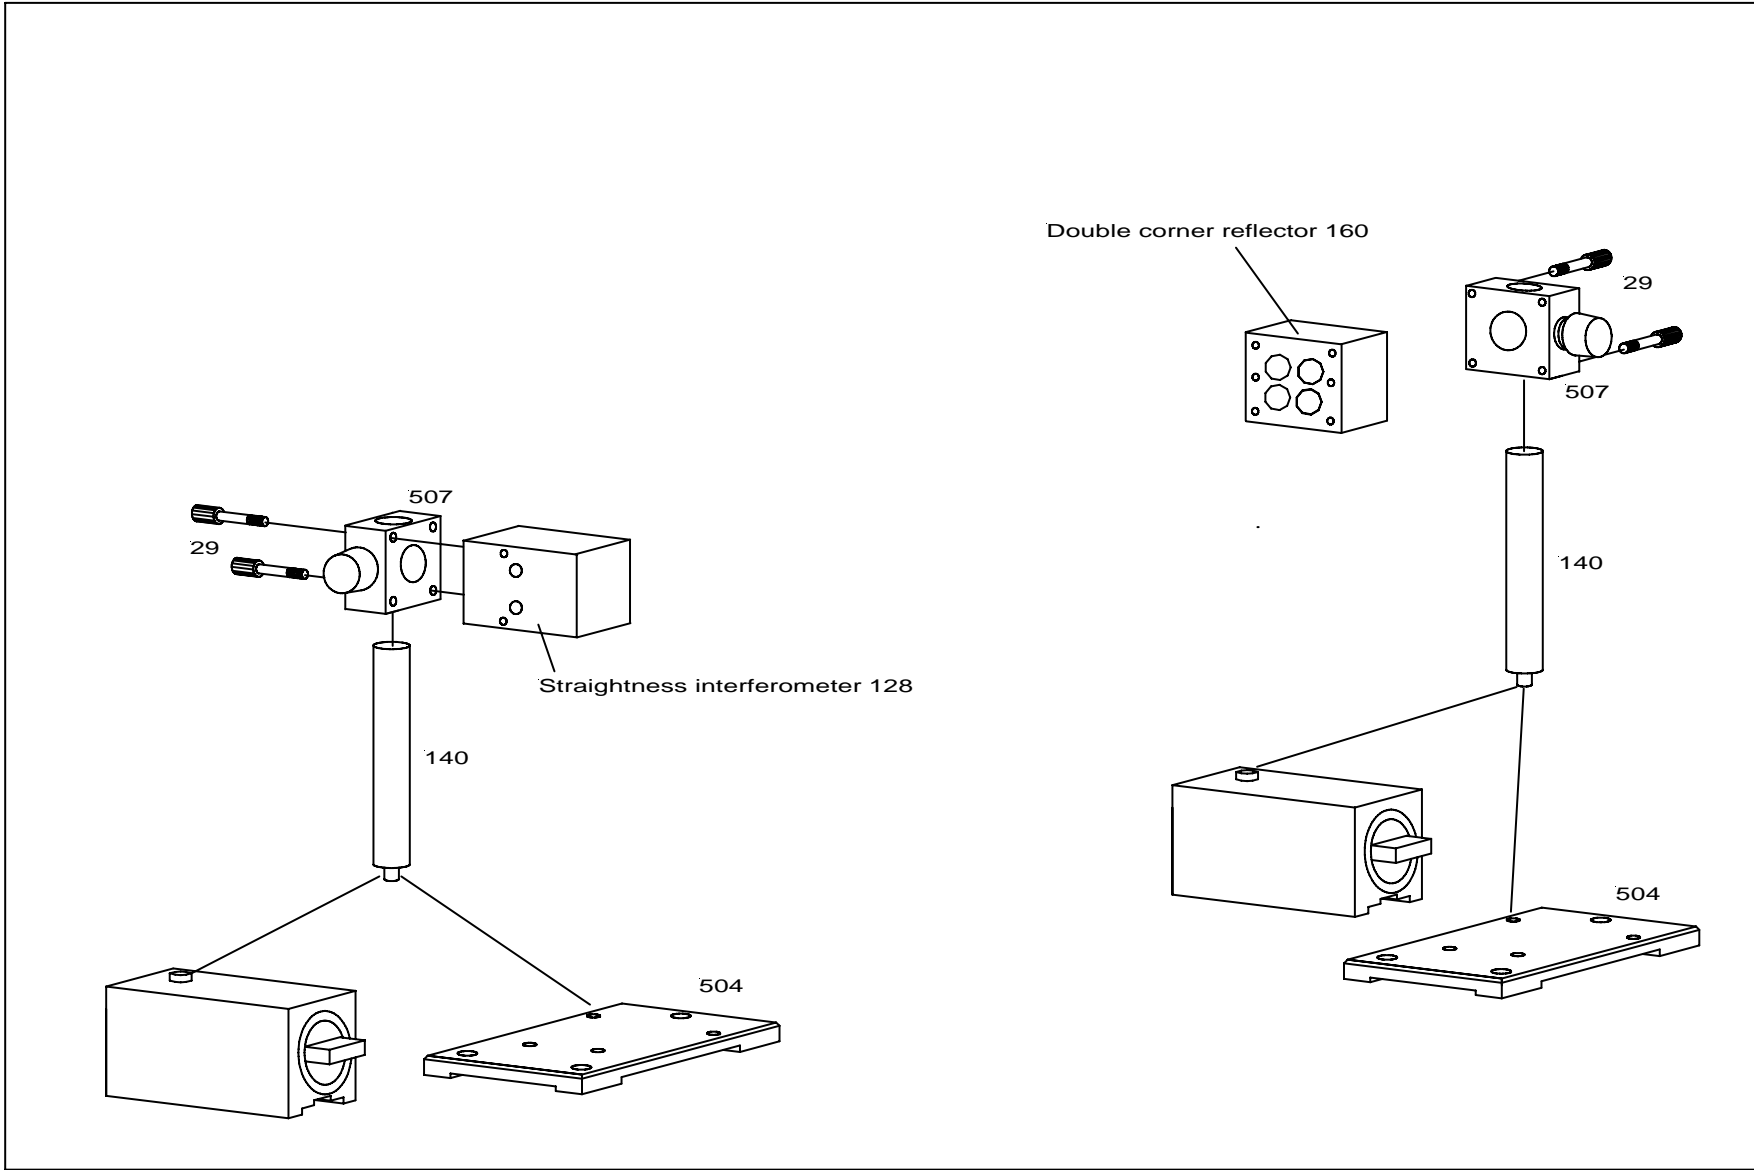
Angle measurement with Straightness interferometer 128 - horizontal configuration
